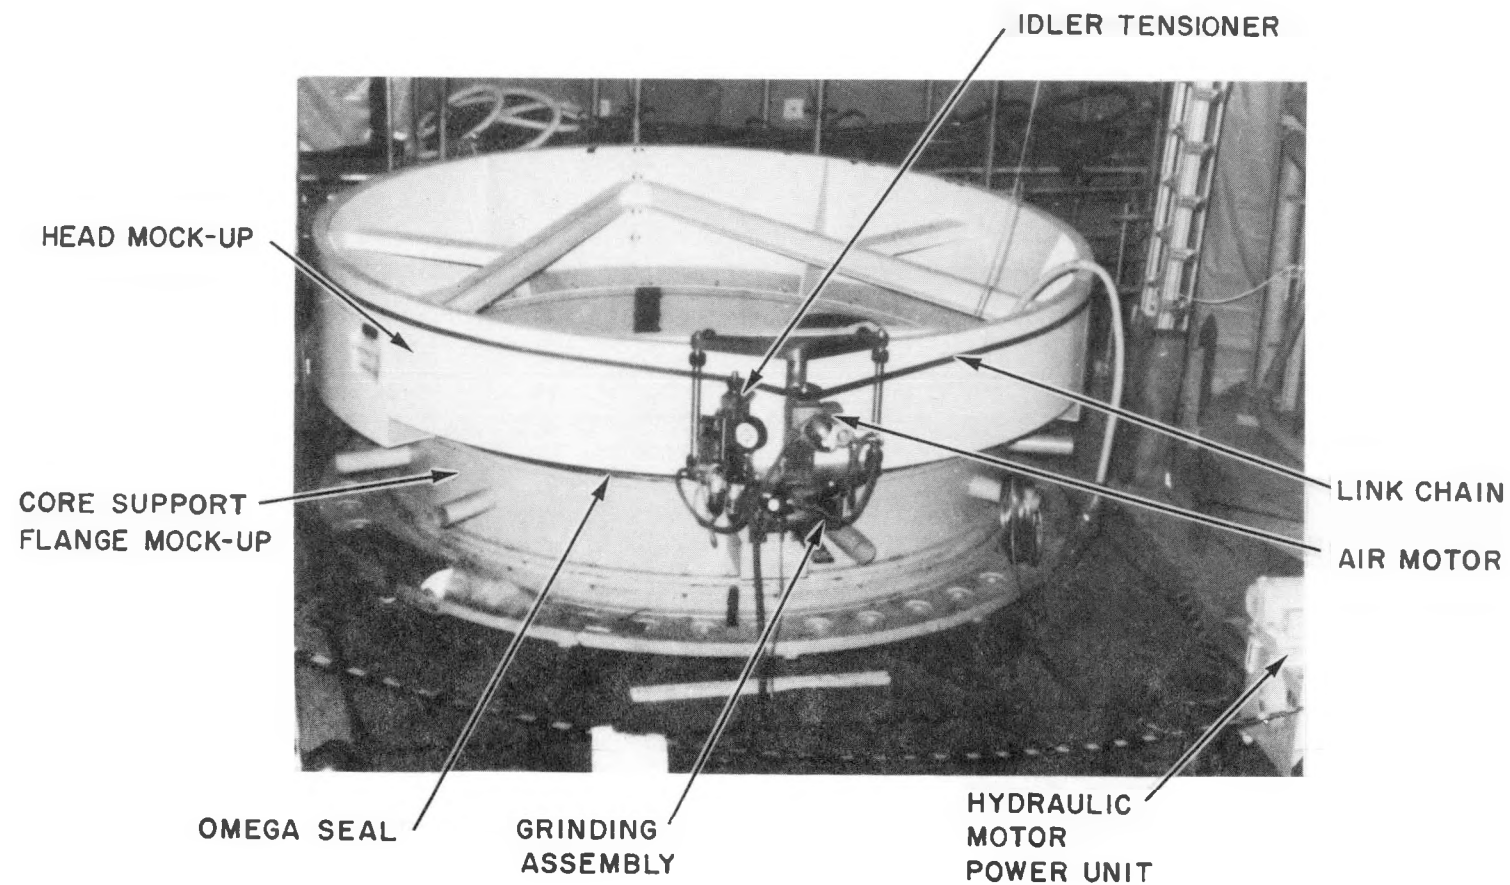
Closure Head Grinding Machine Attached to Mock-up During Checkout
